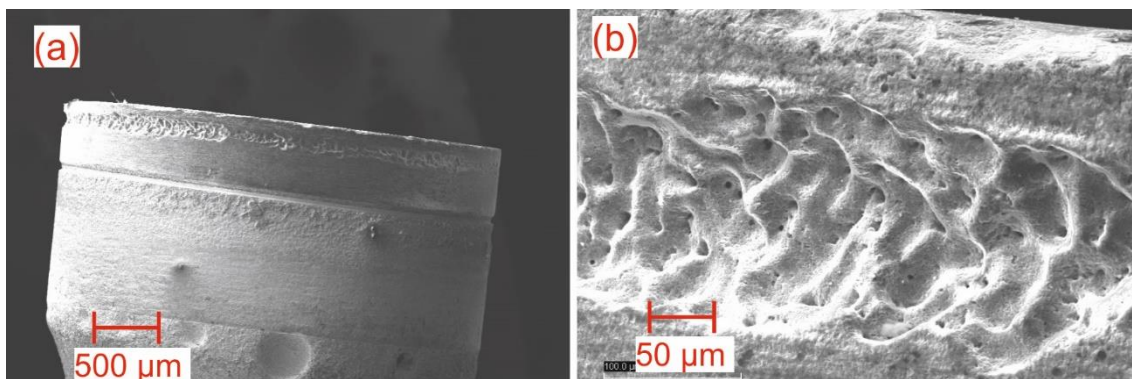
(a) PCD machined with DI water (b) shows a higher magnification section
